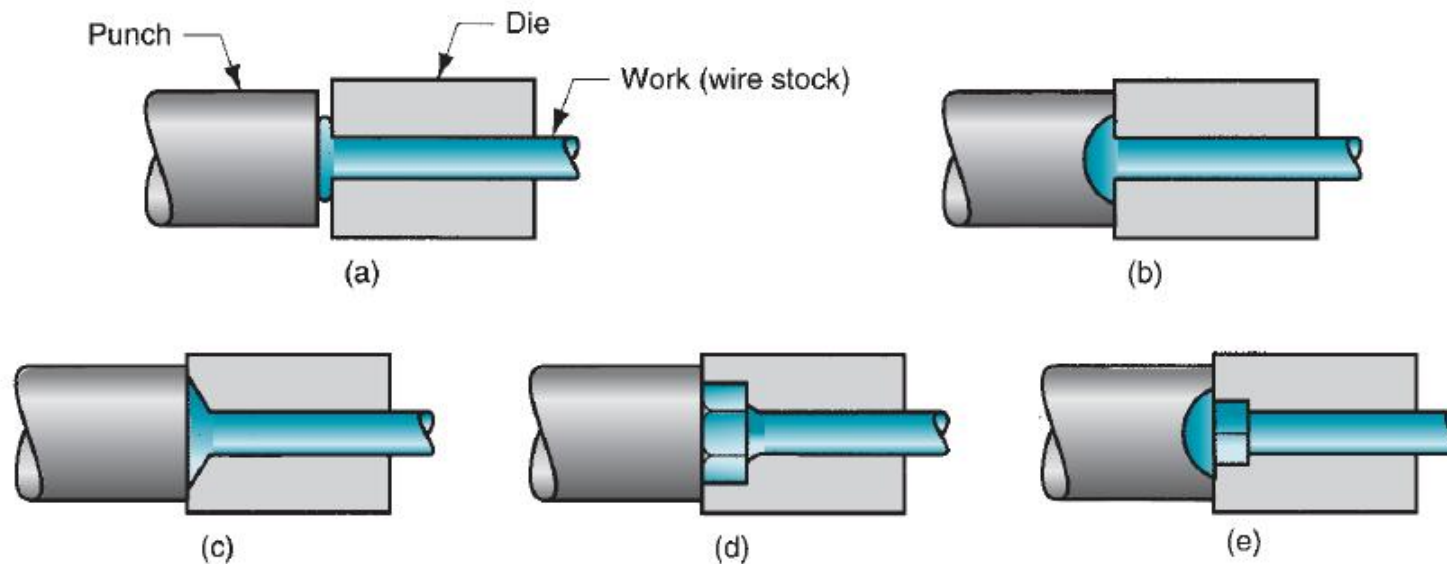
Examples of heading (upset forging) operations: (a) heading a nail using open dies, (b) round head formed by punch, (c) and (d) heads formed by die, and (e) carriage bolt head formed by punch and die.
